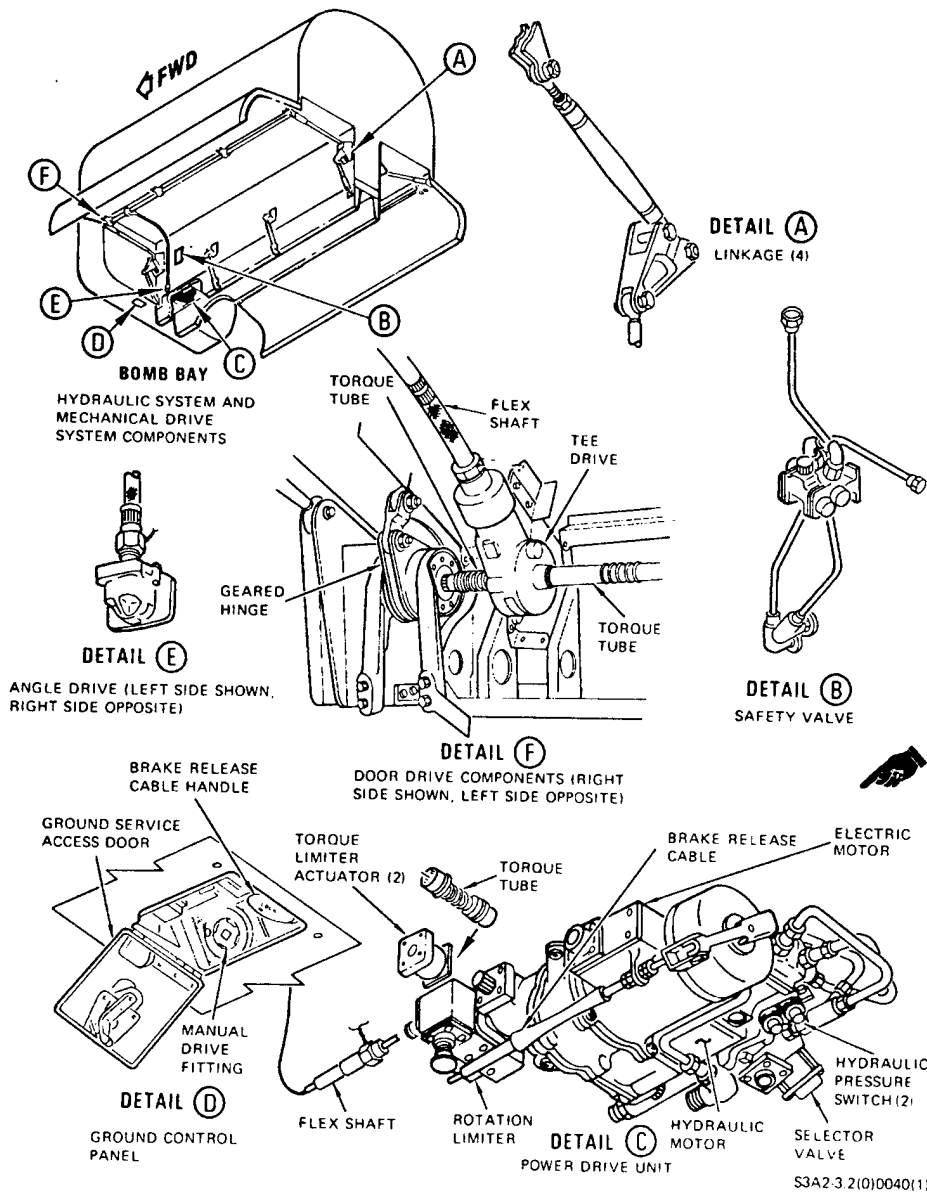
Bomb Bay Door Drive System Controls and Components (Sheet 1 of 3)
